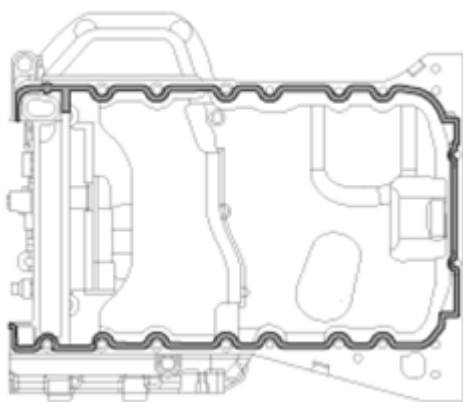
Identifying Liquid Sealant (TB1217H) On Upper Oil Pan
